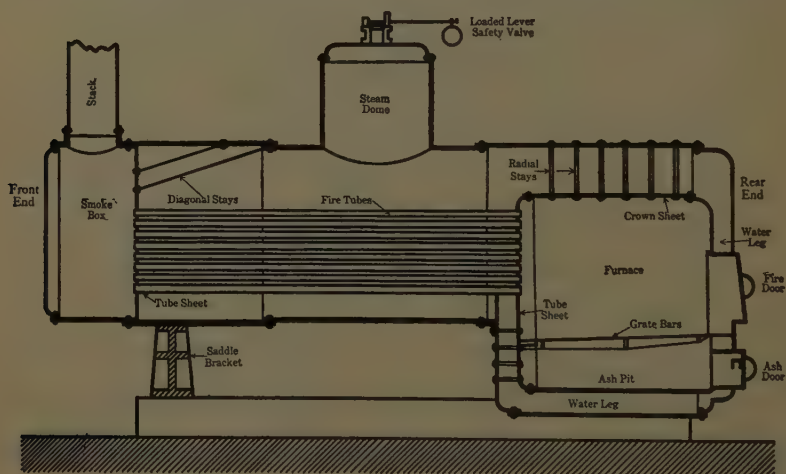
LOCOMOTIVE-TYPE BOILER
